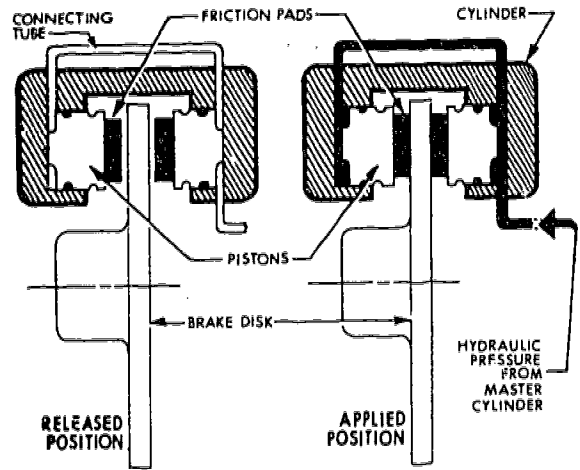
illustrates the operation of a typical disk brake assembly. In actual application, the brake shoes (friction pads) are held in light contact with the disk when the brakes are released by a piston return spring.
